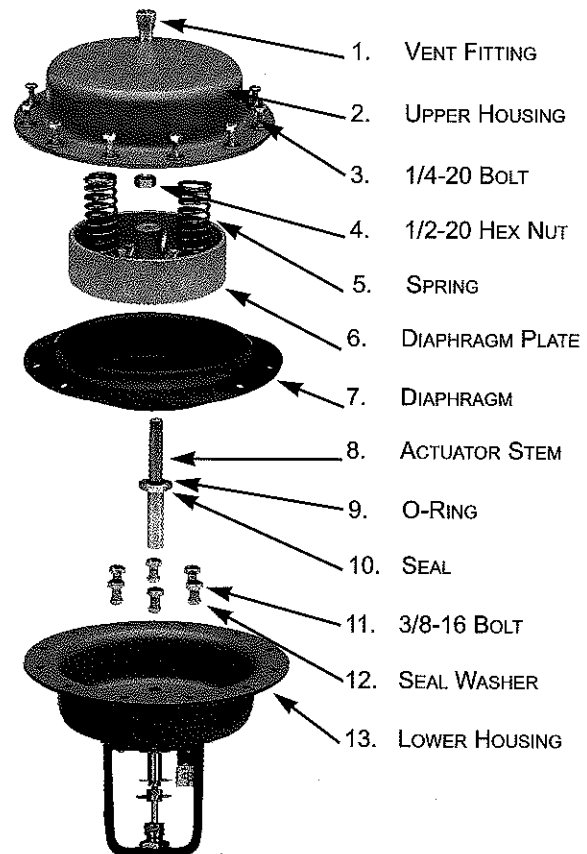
DIAPHRAGM REMOVAL (Reverse Acting):
